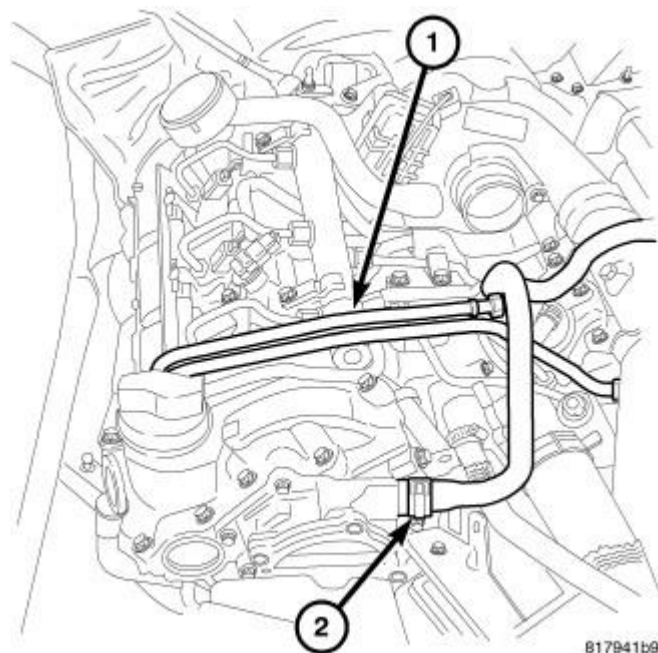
POWER BRAKE BOOSTER VACUUM LINE
